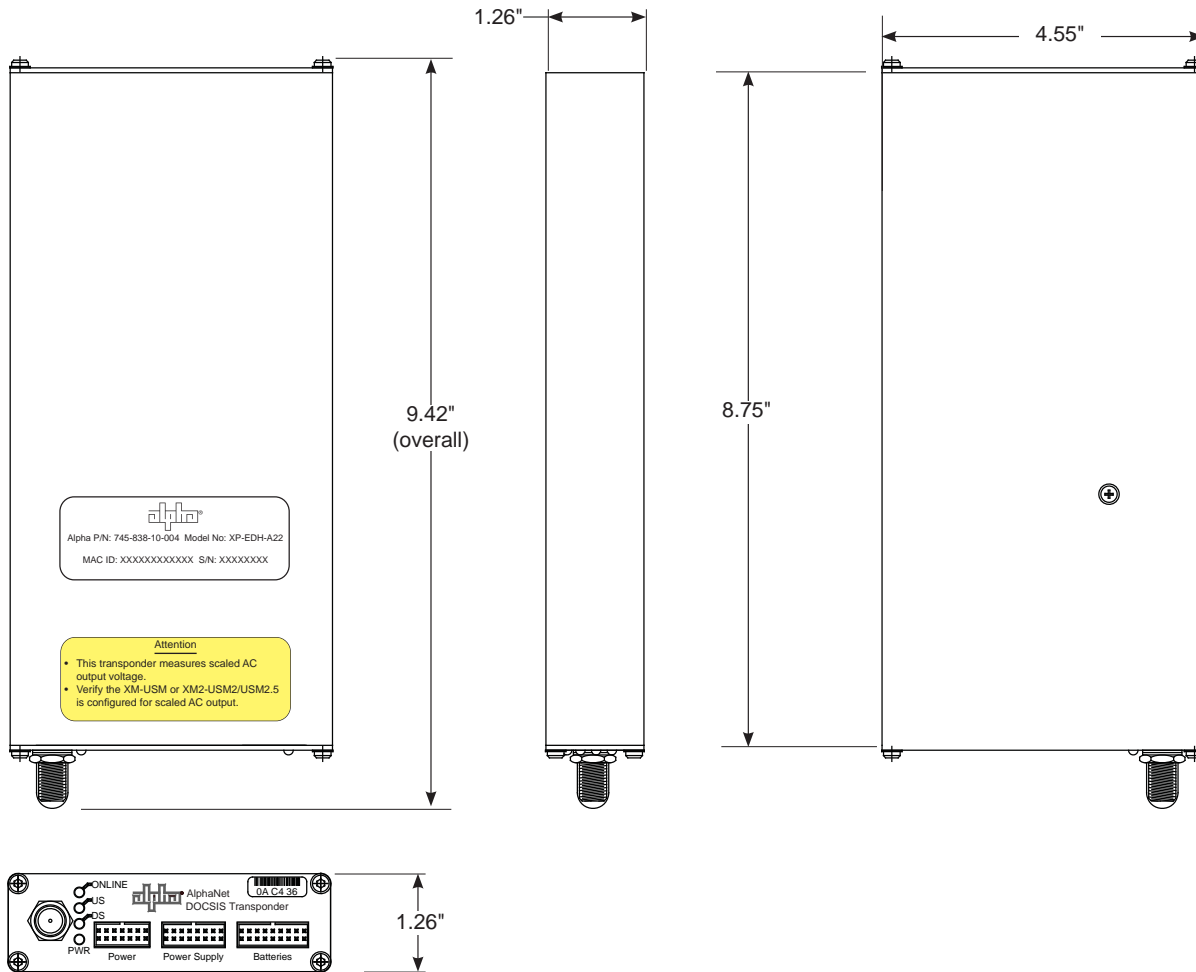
, Outline Dimensions, XP-EDH-A2
